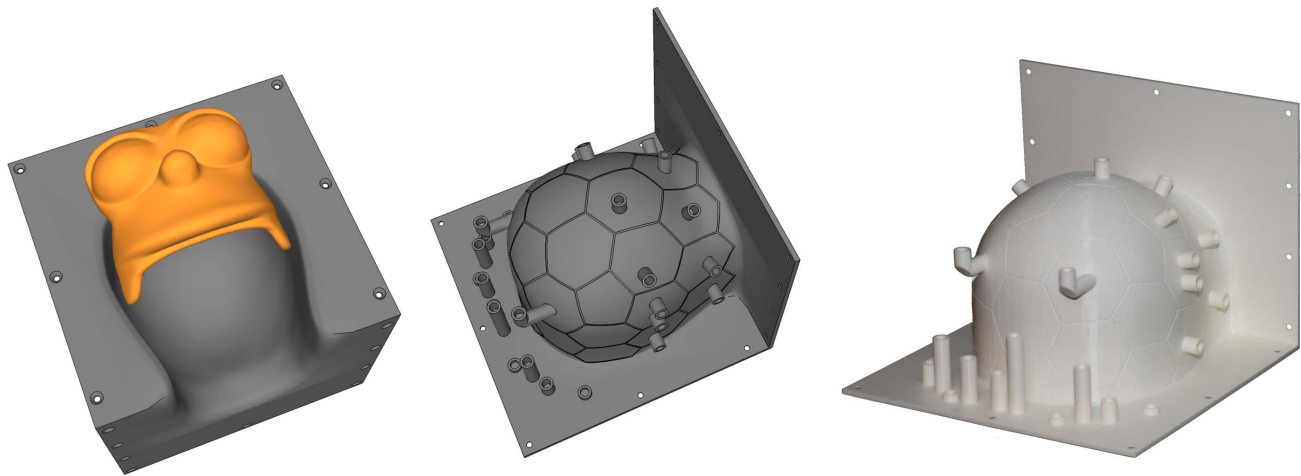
3D CAD model of the coil former (*left, middle*) and 3D printed coil helmet (*right*).
